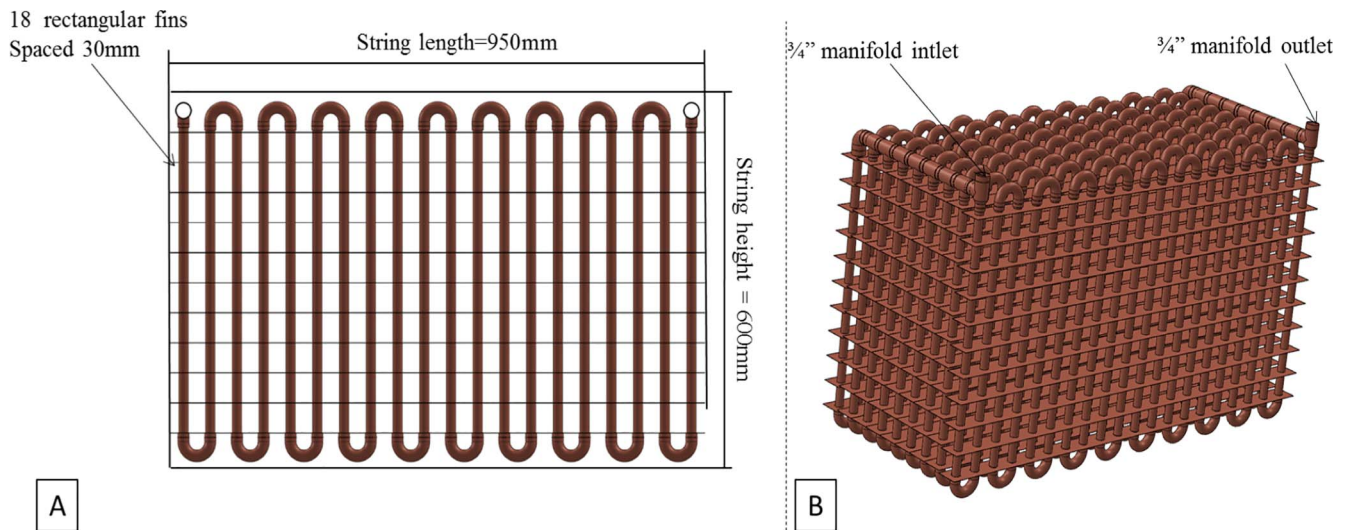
Detailed section view of a single string (A) and isometric view of the store without rectangular enclosure (B).
